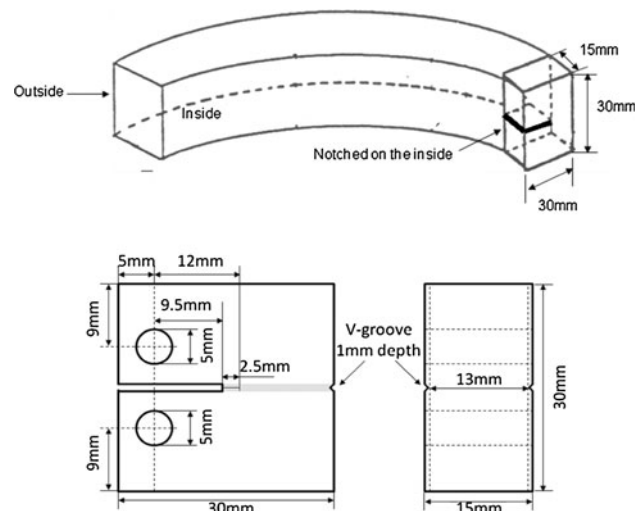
Geometry of the compact tension specimens cut from the pipe wall
